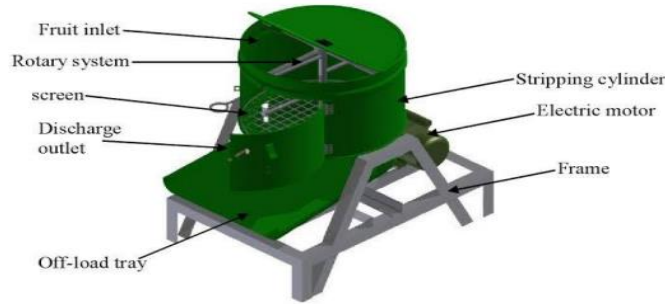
A small-scale Palm Fruit Stripping Machine [21]
